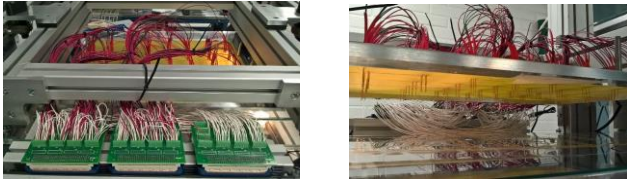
Test fixture for testing sample dedicated to SK6812 5050 size RGB LED foil testing
